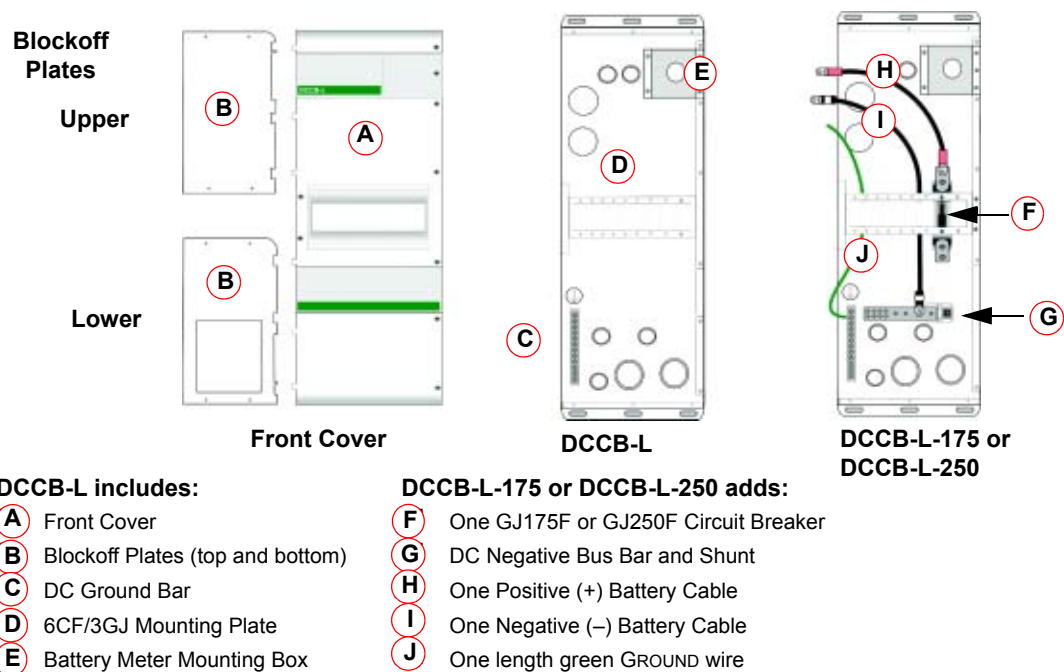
Sine Wave Plus Long DC Conduit Box
